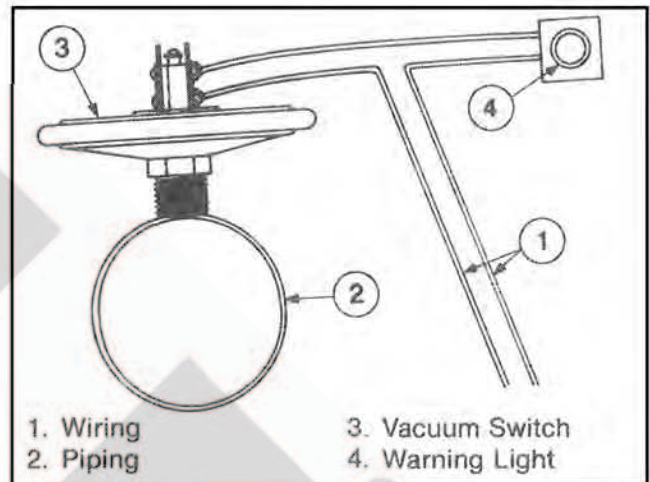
, (N21905). Vacuum switch to check air inlet
